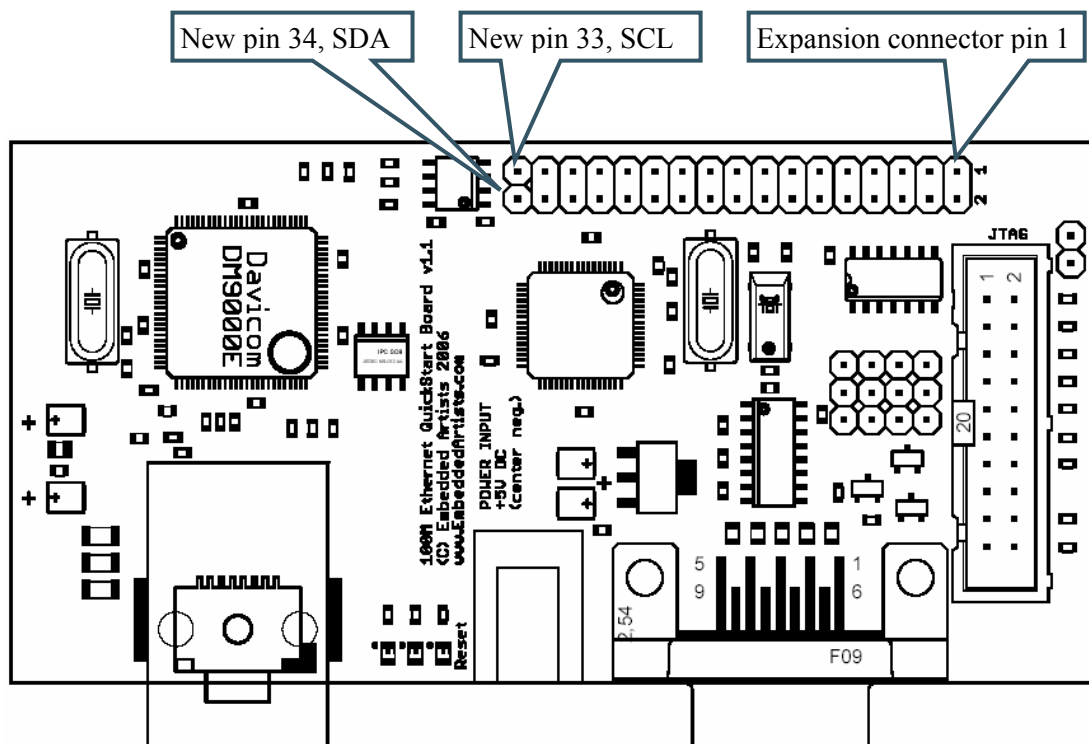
100/10M Ethernet LPC2138 QuickStart Board Expansion Connector, PCB View v1.1
